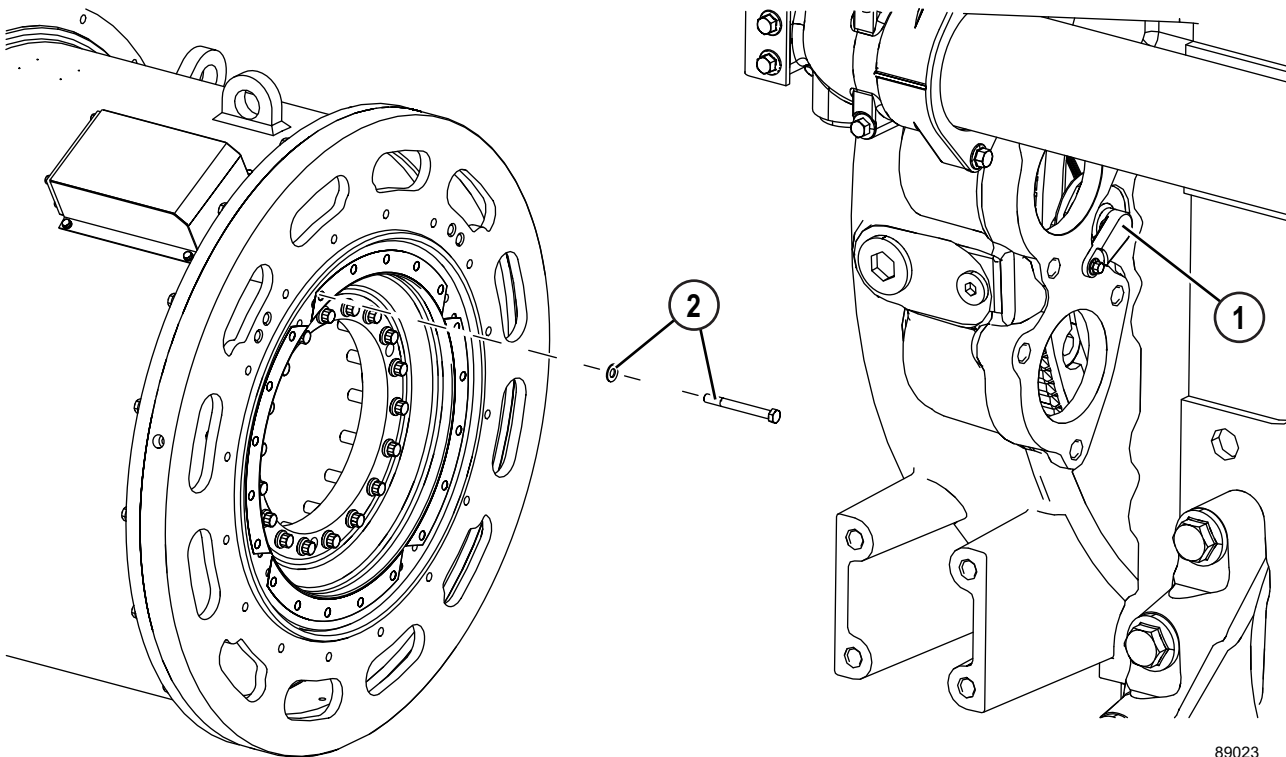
ENGINE DRIVE RING/ALTERNATOR ROTOR CONNECTION
